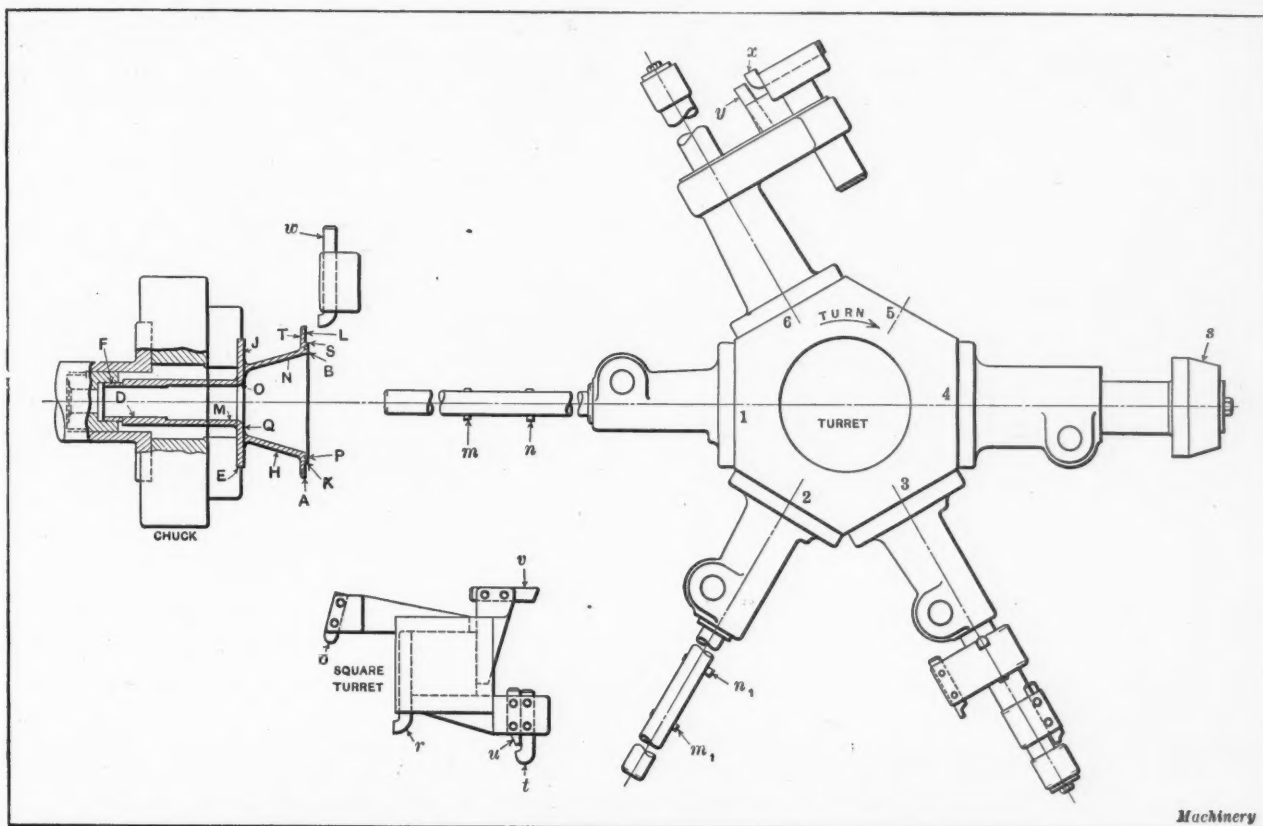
Lay-out and Tooling Equipment used in Finishing Operation on the Flange End of the Nose-piece
